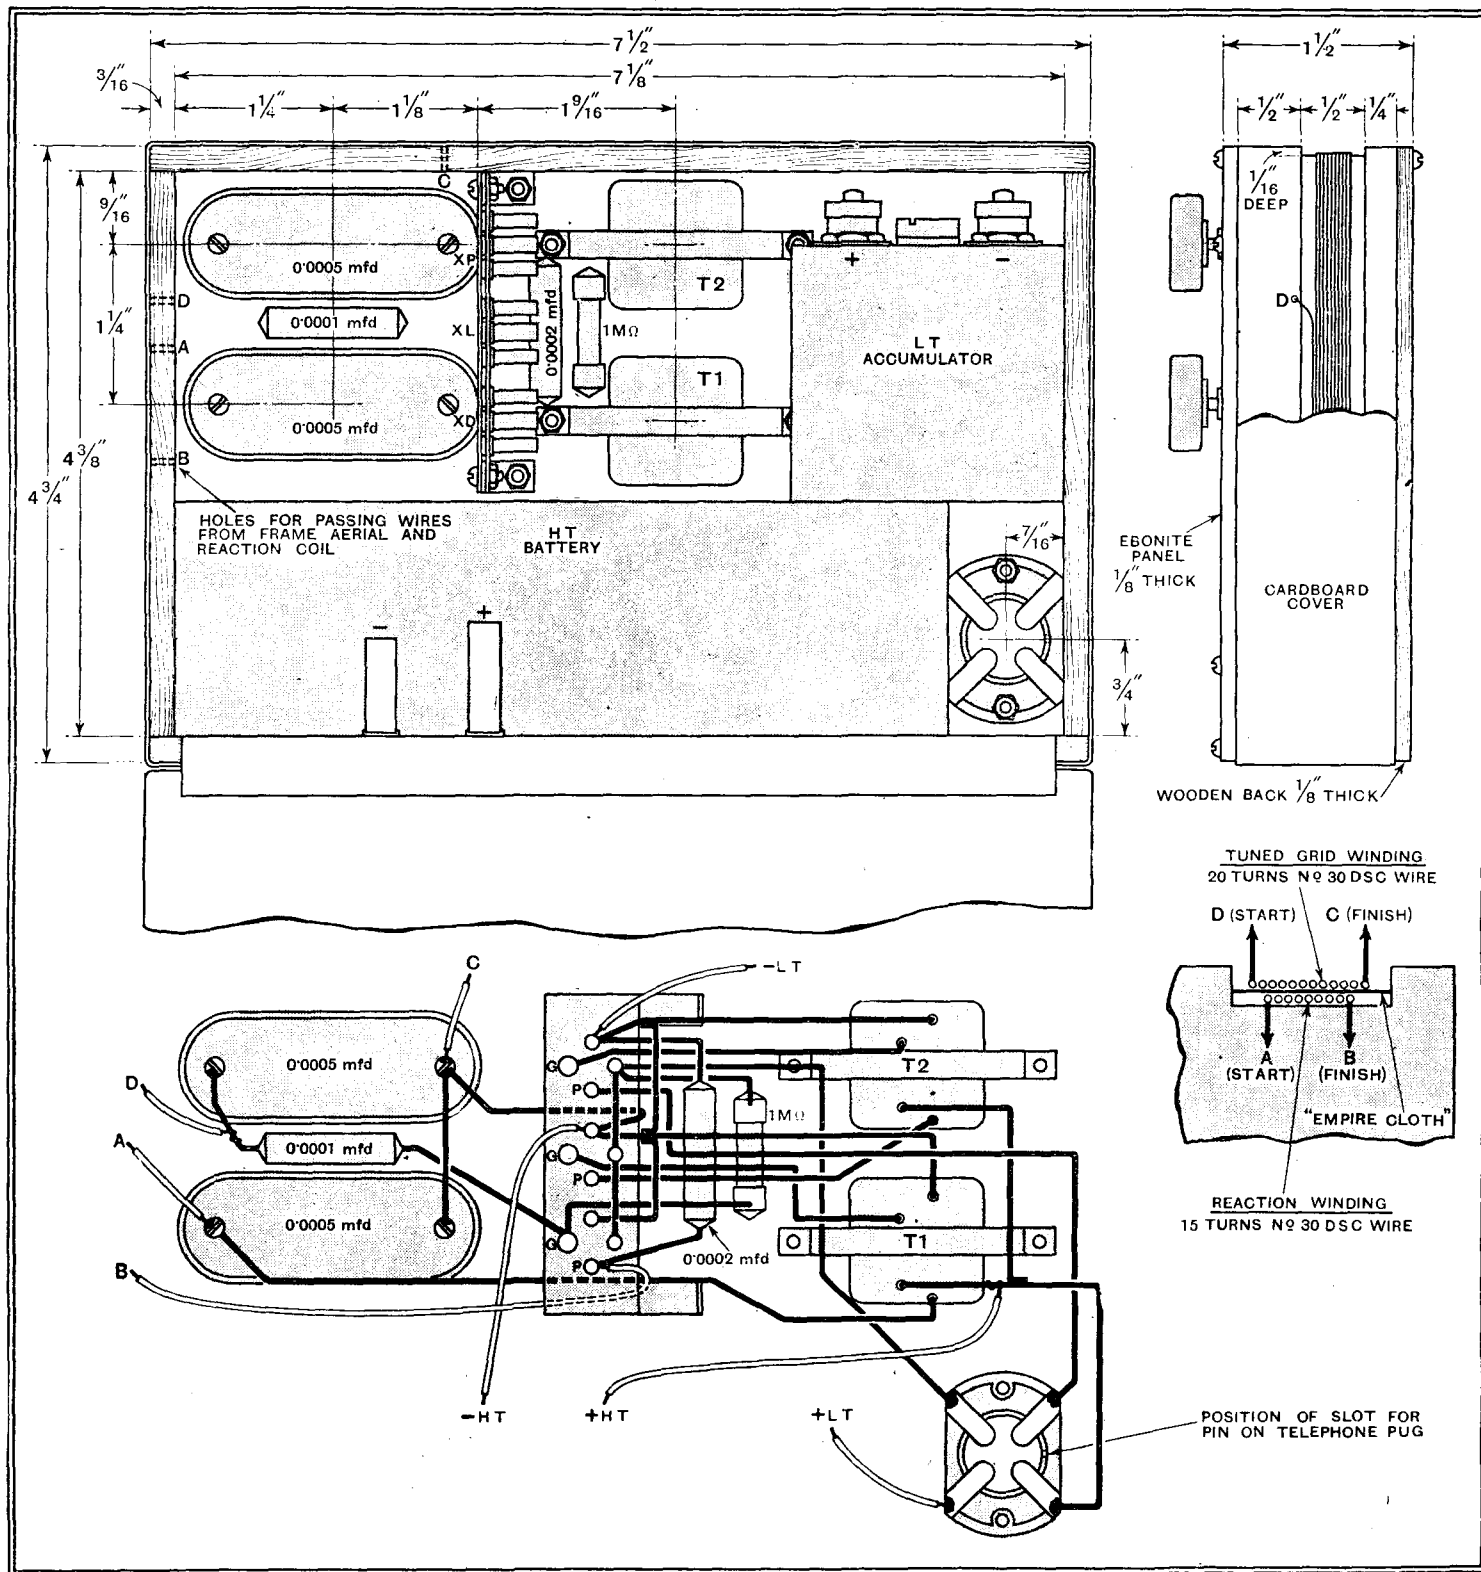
Dimensions, layout of components, wiring connections, and details of frame aerial assembly.
